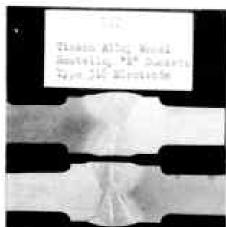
Typical Wheel-and-Bucket Design Test Specimens Welded by the Submerged-Melt Process. Weld Beads are "Wide" Type Deposite. As Welded Plate above, Macro Etch Specimens below.
